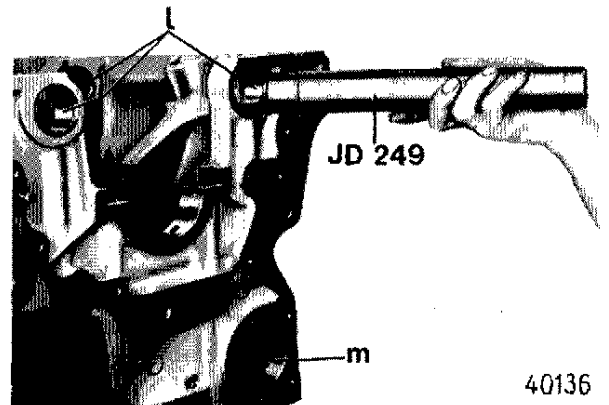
Drift JD 249 to Remove and Install Balancer Shaft Bushings
